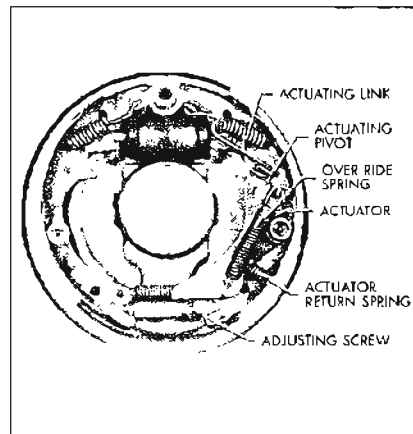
Front Left Brake Self-Adjuster Assembly
